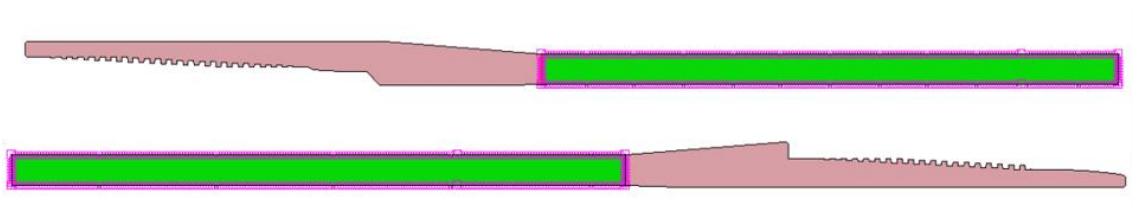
Local Seeds – OD and ID edges away from Seal, Threads and Shoulder
